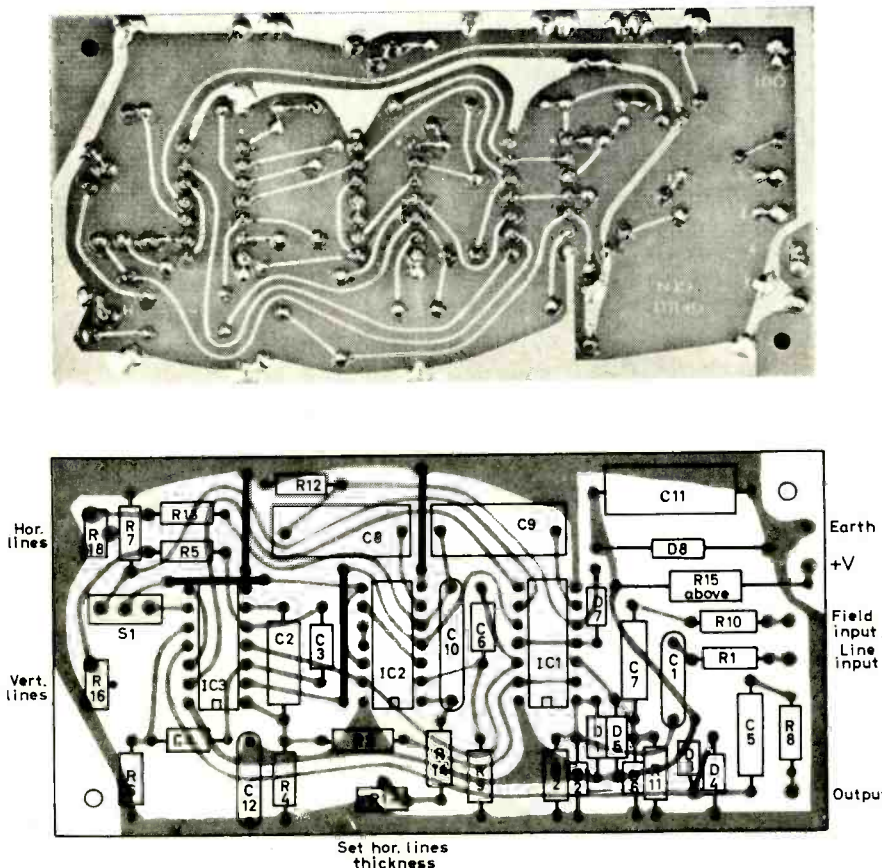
(Upper) Photograph of the printed circuit board shown actual size (101mm in length). (Below) Drawing of the component side of the board.
